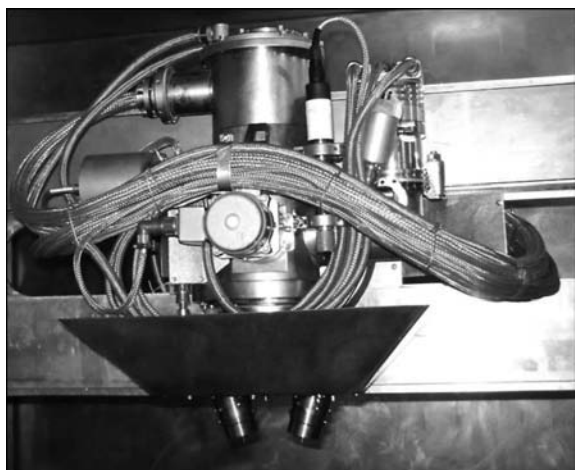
Appearance of in-chamber welding electron beam gun with 60 kV accelerating voltage and 60 kW beam power
